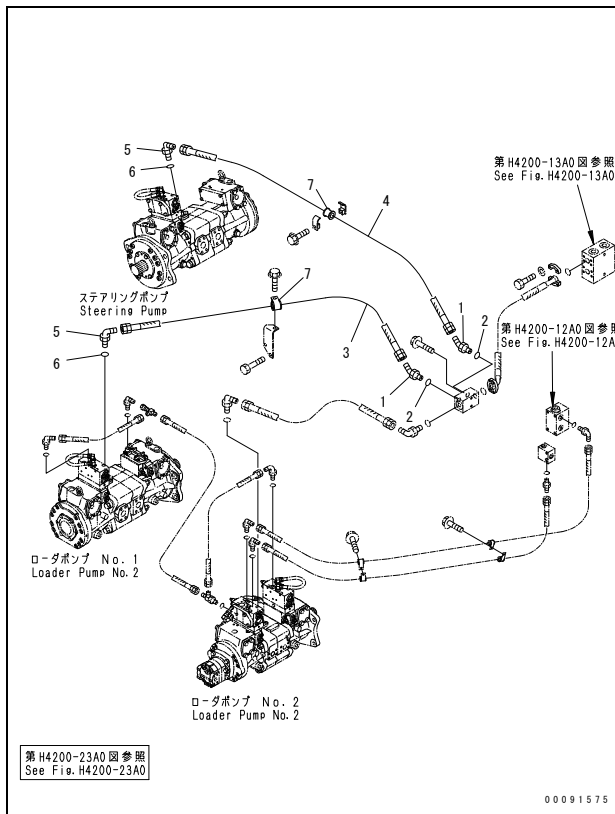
R0067 (STEERING PUMP) (PUMP DRAIN LINE)
